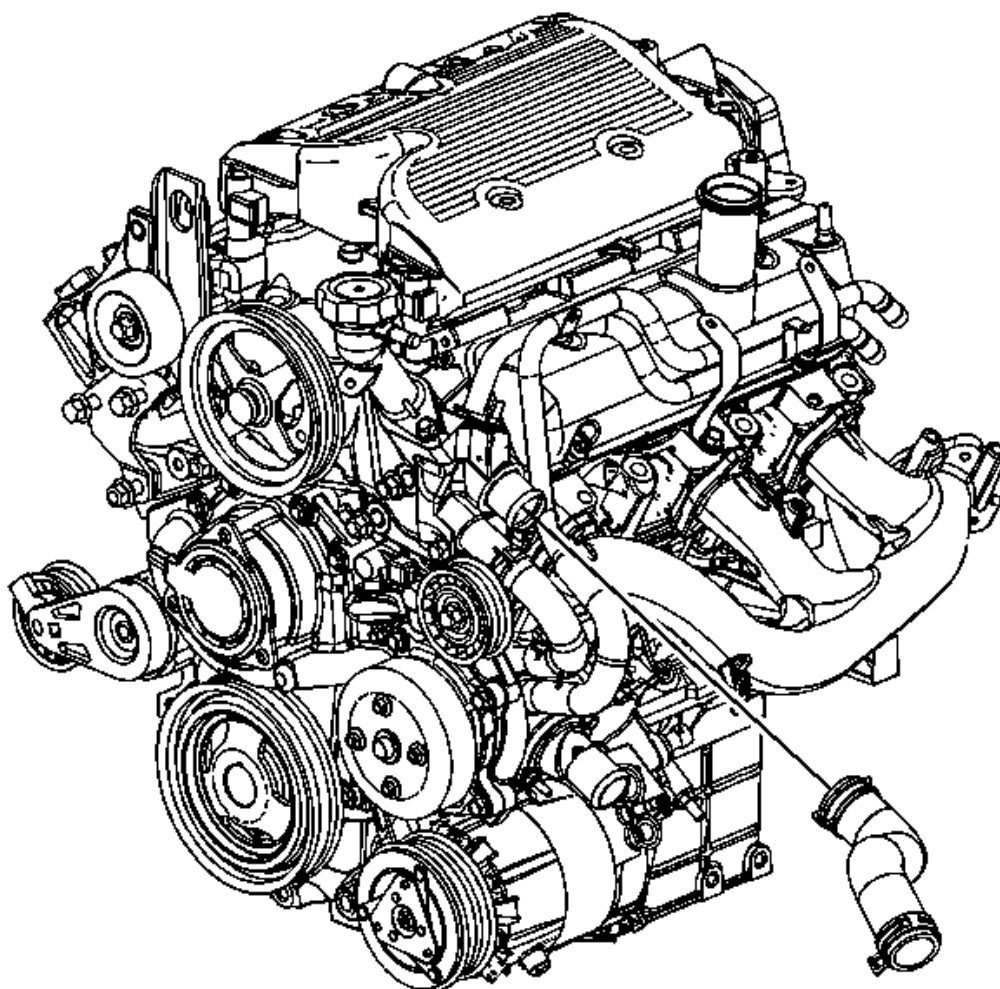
View Of Radiator Inlet Hose & Crossover Pipe
